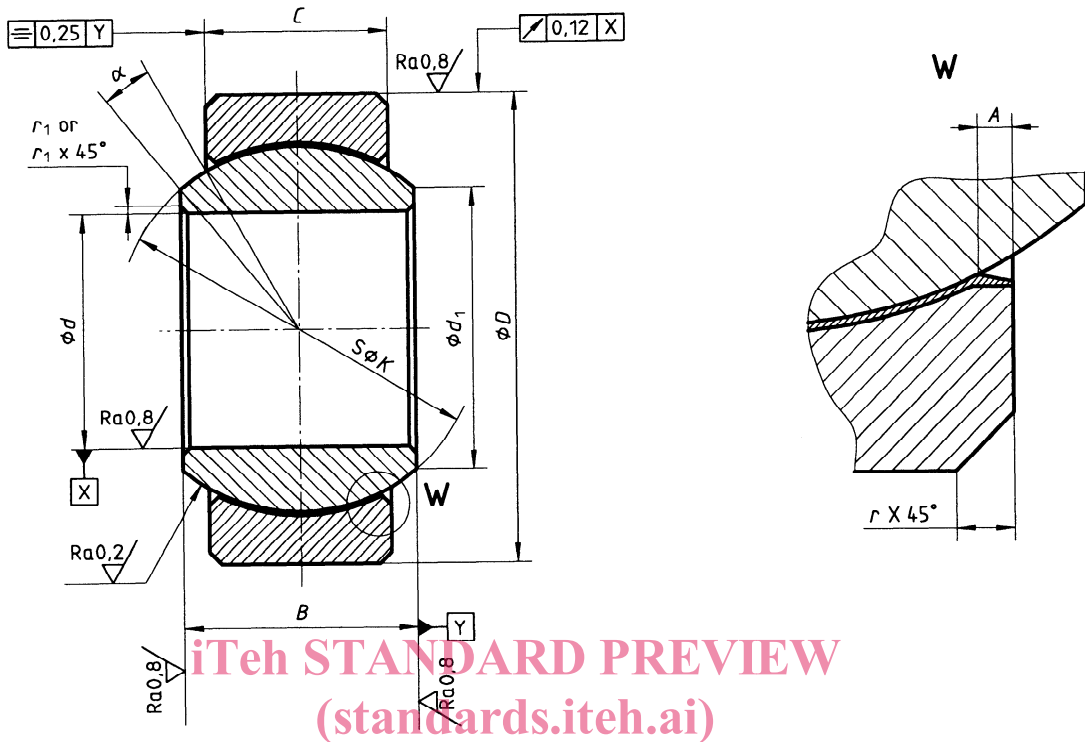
Spherical plain bearing with self-lubricating liner without face groove
